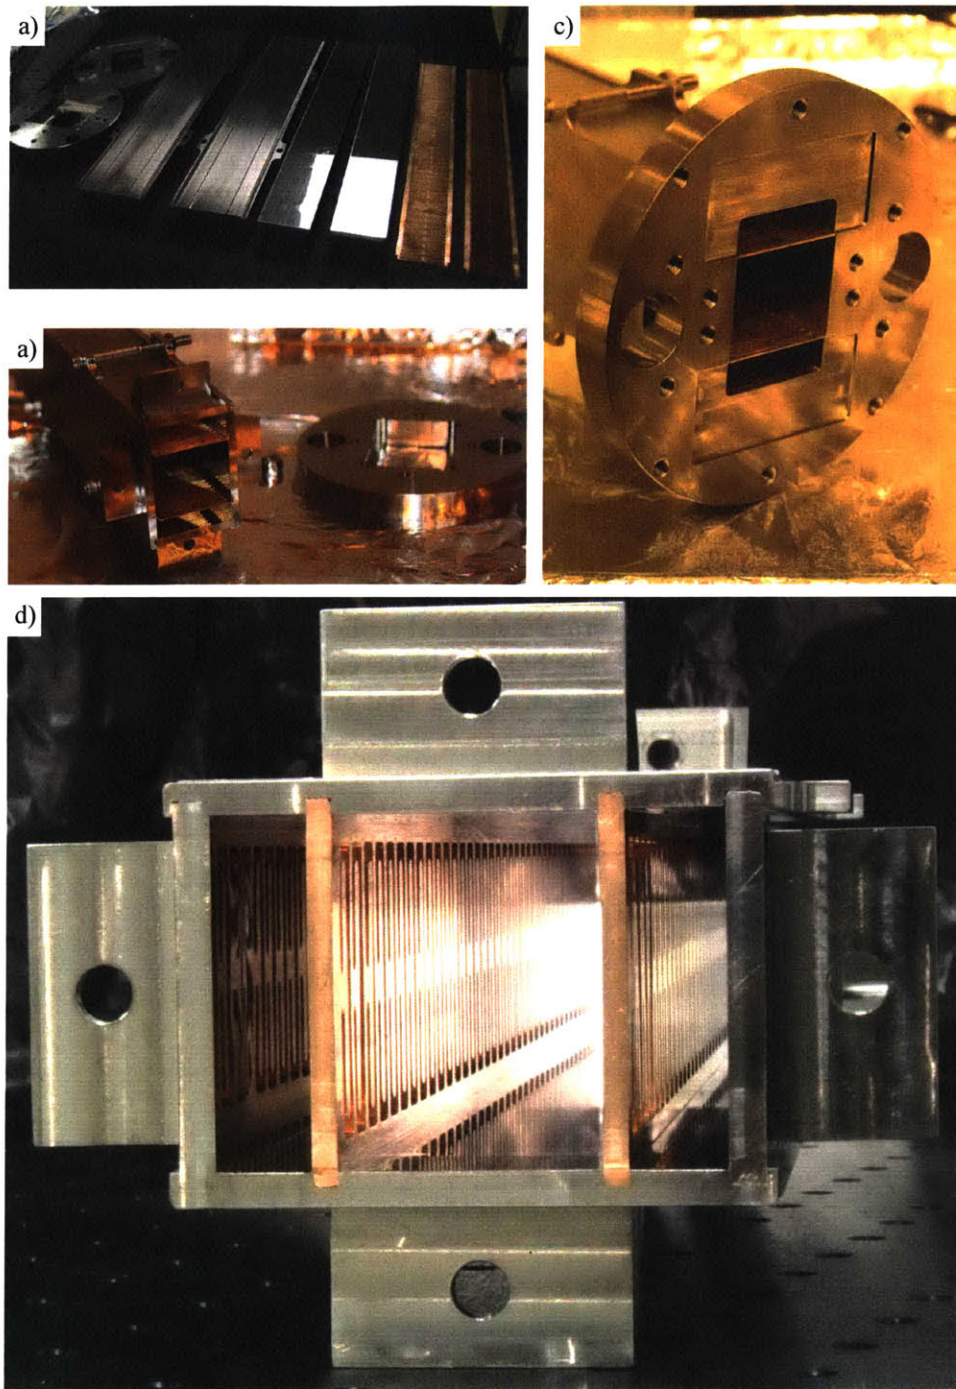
a) Photograph of the unassembled 352 mm MTM1 metamaterial structure which is composed of 6 plates that are bolted together and then bolted in between two unique end flanges. b) Photograph of the MTM1 metamaterial structure bolted together without end flanges and c) with end flanges showing the collector side of the structure (inner dimensions of the metamaterial waveguide are 63 mm x 43 mm for scale). d) Photograph of the 370 mm brazed MTM2 metamaterial structure (inner dimensions of the metamaterial waveguide are 63 mm x 43 mm for scale).
